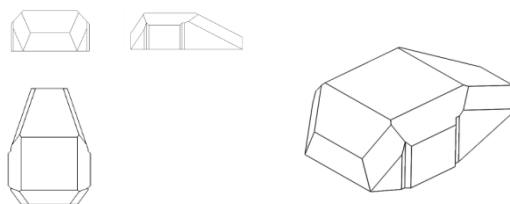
Left: first angle view of casing prototype drawing. Right: isometric view of casing prototype drawing.
